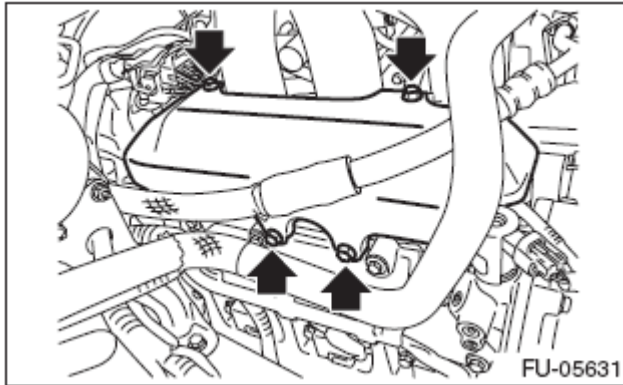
Locating Fuel Pipe Protector Mounting Screws
